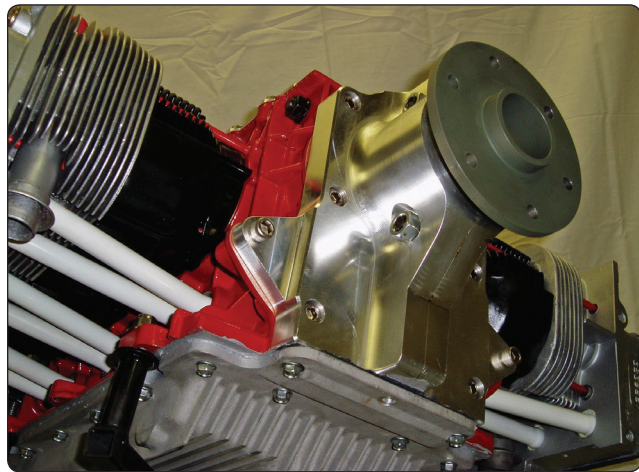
Front-end bearing on the 1000 IFB engine.
